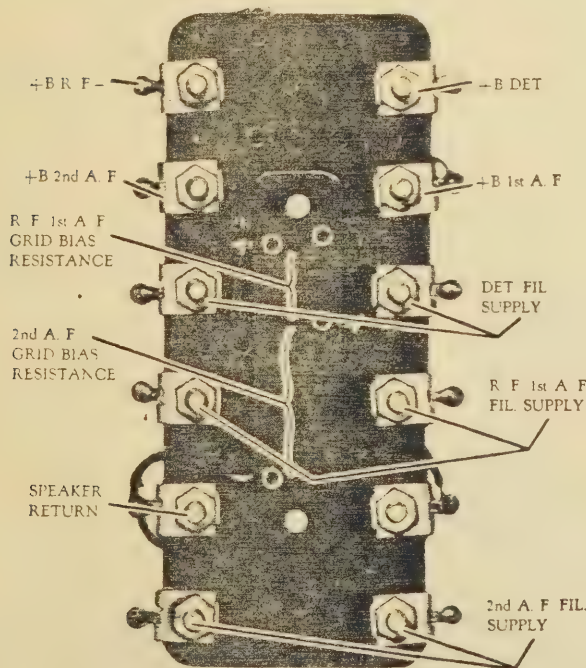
TOP VIEW OF PANEL ASSEMBLY USED IN POWER UNIT OF MODELS 40, 42, 44 AND 52
